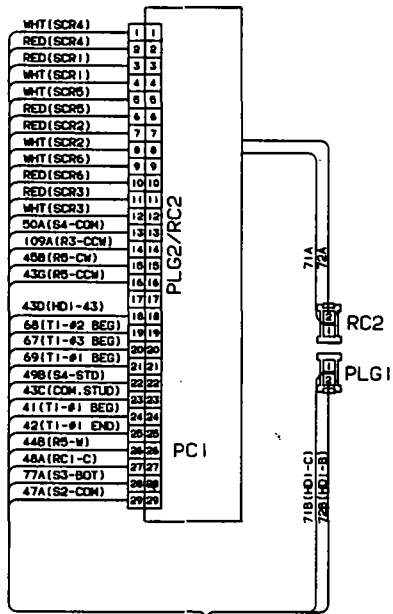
Wiring Diagram For Welding Power Source
